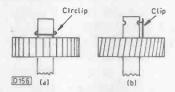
Difference between the type of gear used in the G mechanism (a) and the helical gears used in the K mechanism (b).
